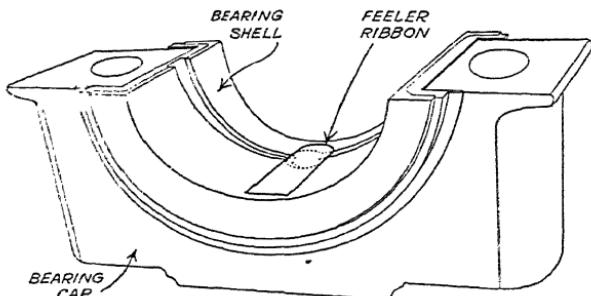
Use of a Narrow Shim for Testing Main-Bearing Clearance
